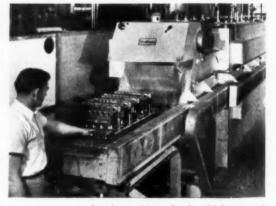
Multiple drilling and reaming of all holes going through crankcase. Other holes are drilled in the sides on a similar machine: Motch & Merryweather with a U. S. multiple drillhead.
